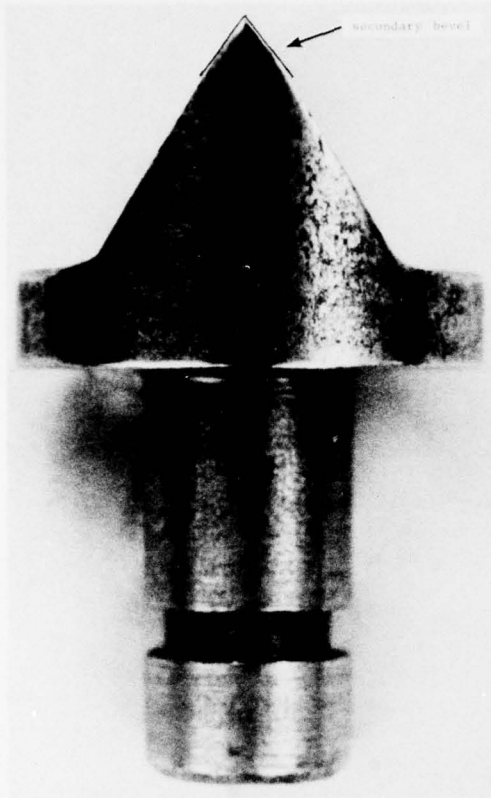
Cutter with secondary bevel angle. The bevel reduces wear at the cutting edge.
